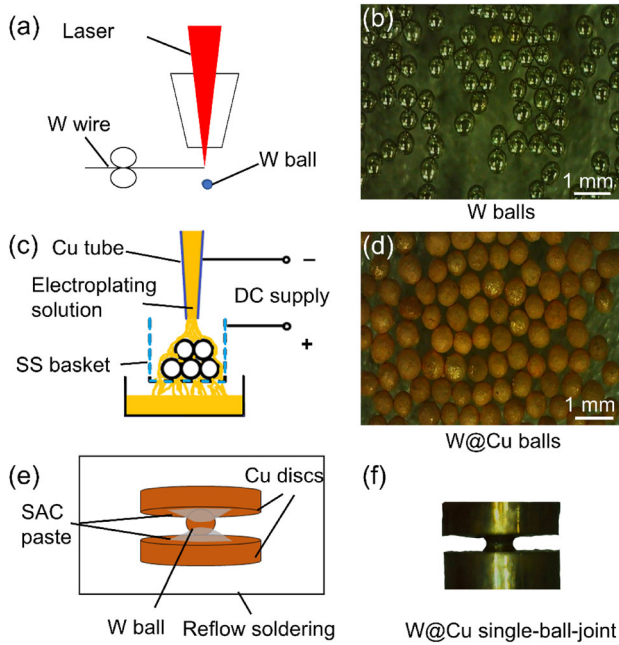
Preparation illustration and samples for single tungsten ball solder joints: a, b for tungsten balls; c, d for tungsten solder balls; and e, f for single tungsten ball solder joints
